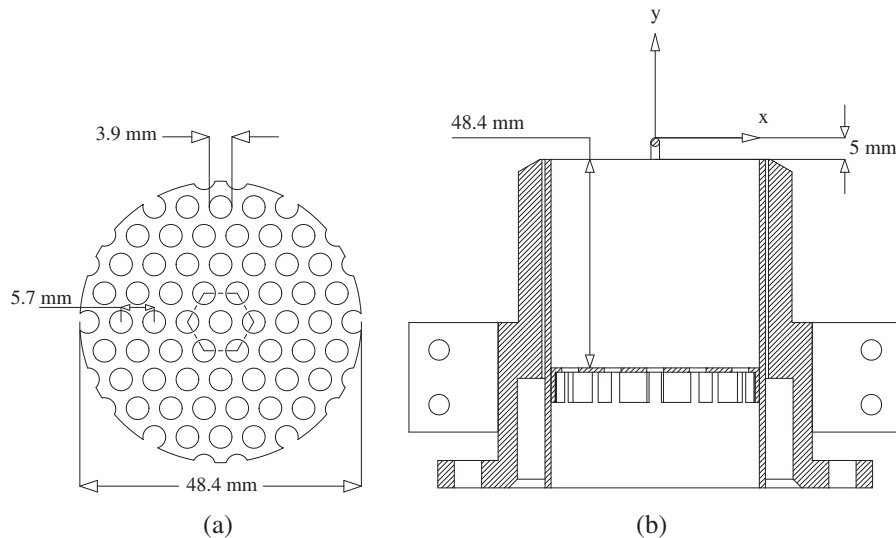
(a) Perforated plate and (b) plate arrangement inside the burner nozzle.
